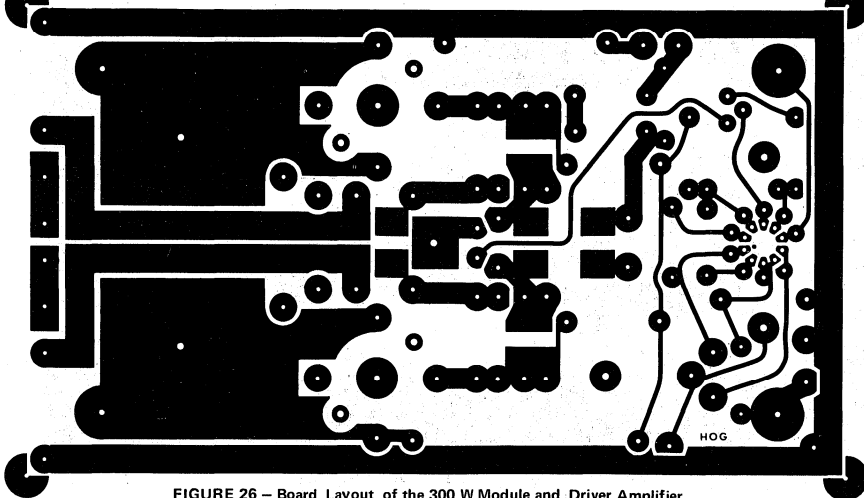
Board Layout of the 300 W Module and Driver Amplifier
